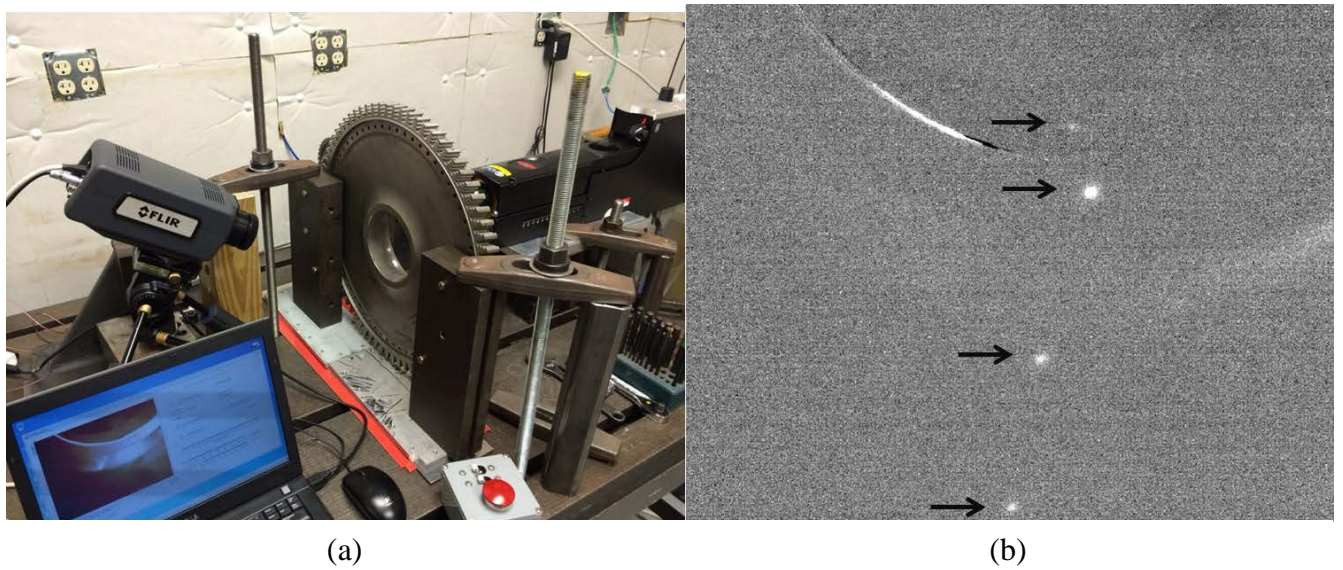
The (a) bore inspection setup for SIR and (b) example results of SIR bore inspection
